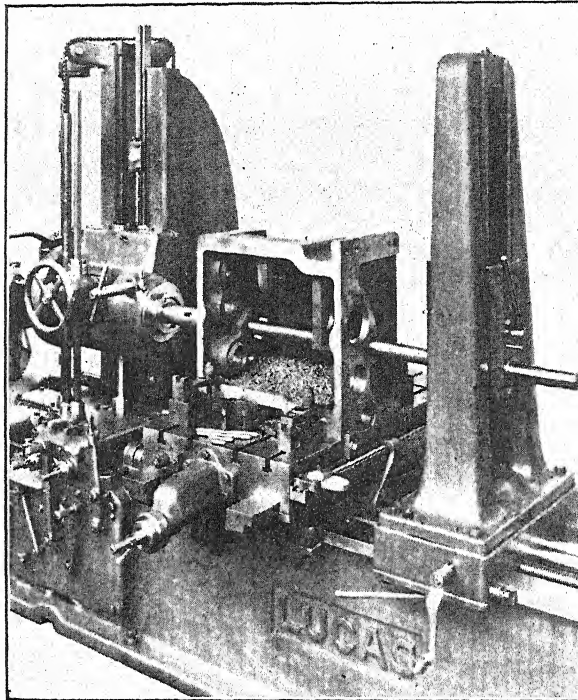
The Lucas No. 43 Horizontal Boring, Drilling, and Milling Machine.
